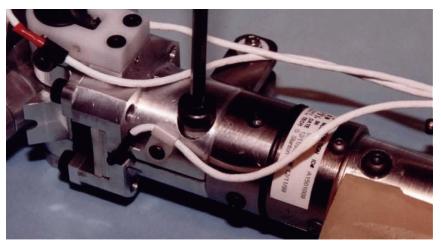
Secure the Lower Tibia to the Ankle assembly
